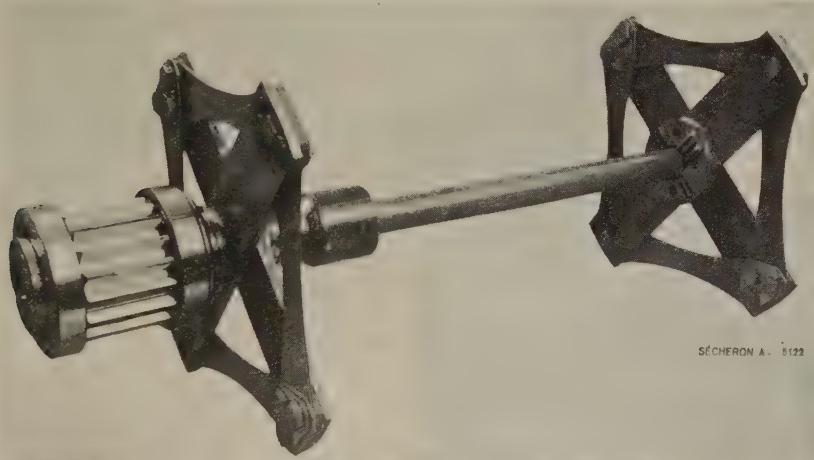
Cardan shaft (passing through the hollow armature shaft), with drivers, leaf-springs, crenellated couplings and pinion, for the motor brake vans, series 801 of the CFF (fig. 444 and 518 to 521).
